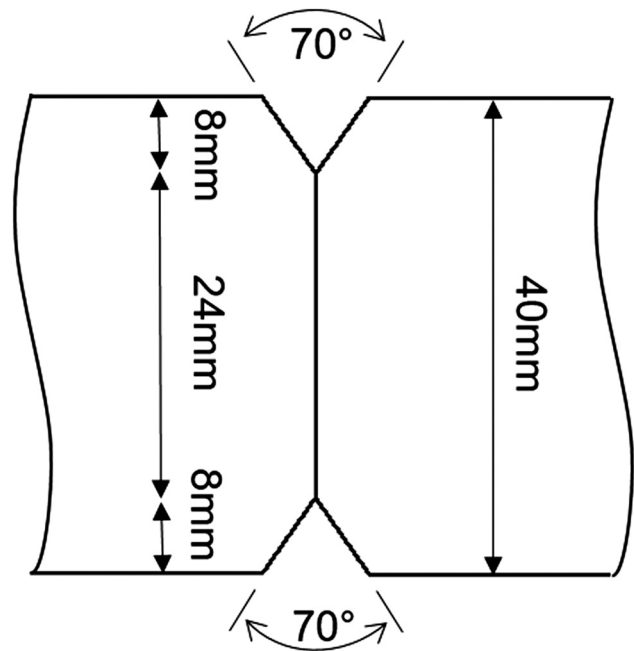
Weld seam preparation for 40 mm plate thickness for the SA-LAHW process.
